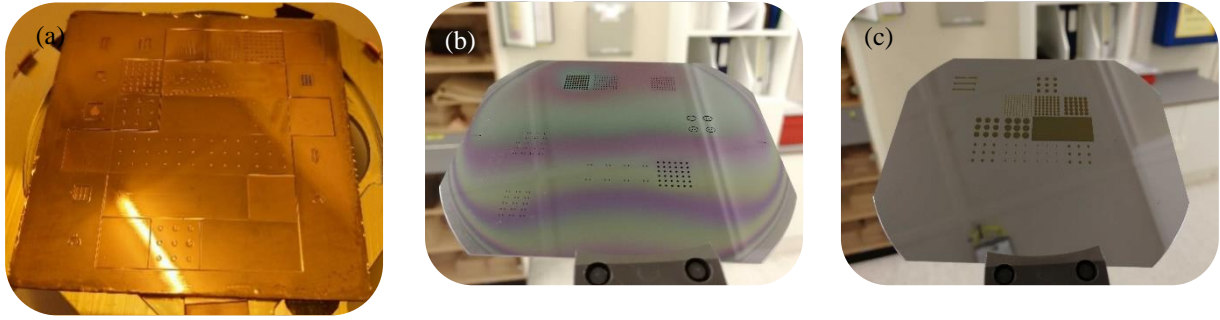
The three moulds used in the Besi experiment. (a) Besi top mould. (b) Wafer mould. (c) Photoresist mould.
